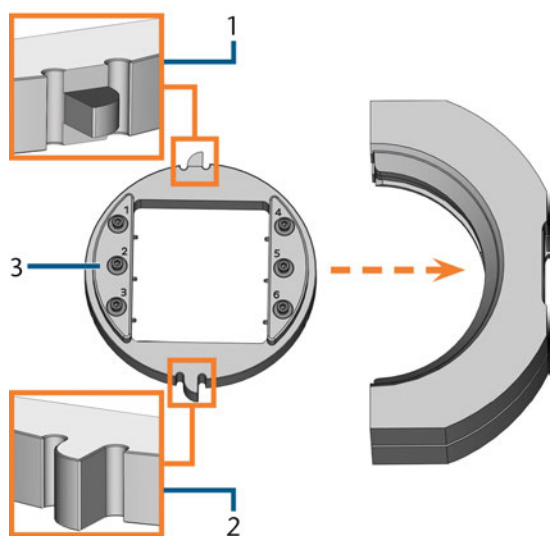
INSERTING THE CORRECTLY ORIENTATED BLOCK HOLDER INTO THE BLANK HOLDER
